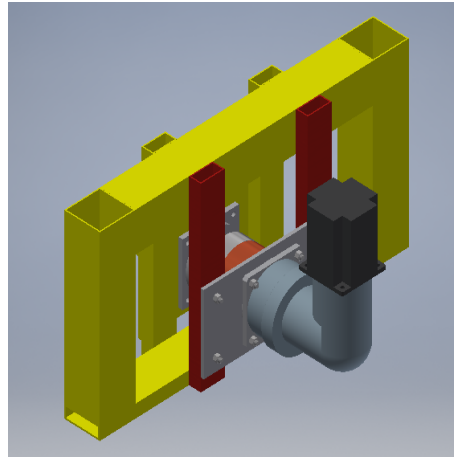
Assembly 2 – Welding of assembly 1 on tire test frame
